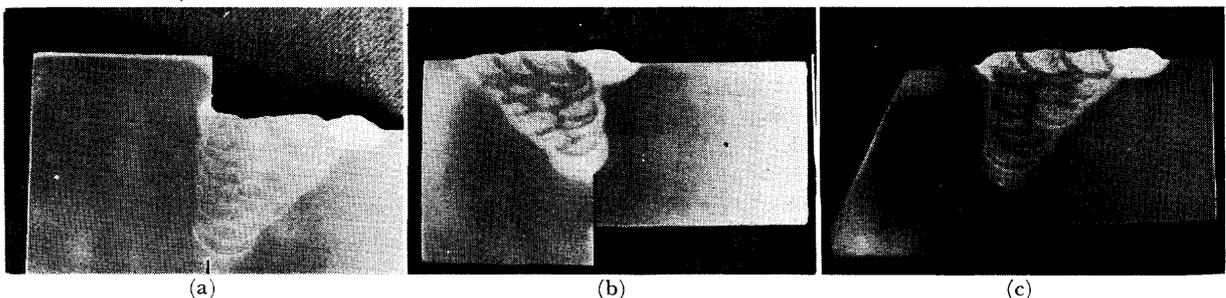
Macrophotographs of weldments ( $h_T=30$  mm) (a) Type P, (b) Type W, (c) Type C
